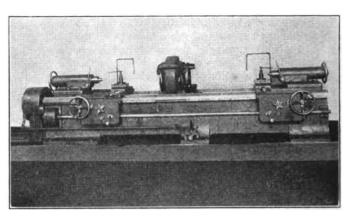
The Machine with the Filler Blocks in Place for Use as an Axle Lathe
